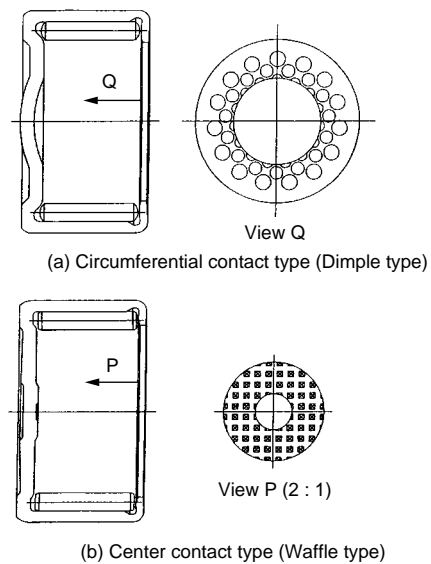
Designs of drawn cup needle roller bearings⁸⁾
